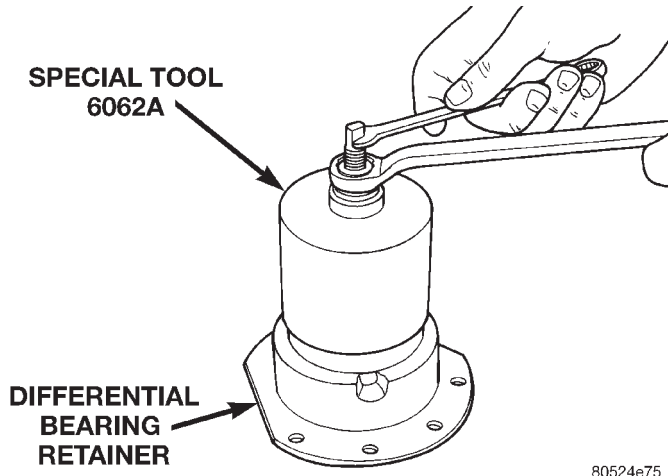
Position Bearing Cup Remover Tool in Retainer
